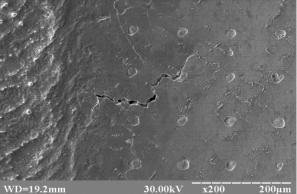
Cracks in HAZ of nickel-based alloy after welding
